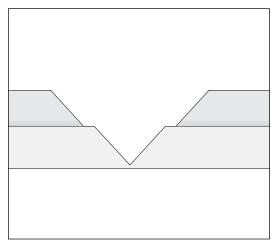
Proper V-groove cut when using 90° blades. A perfect cut is seen above. Note that there remains approximately $\frac{1}{6}$ (3 mm) of fiber glass in the bottom of the groove.
